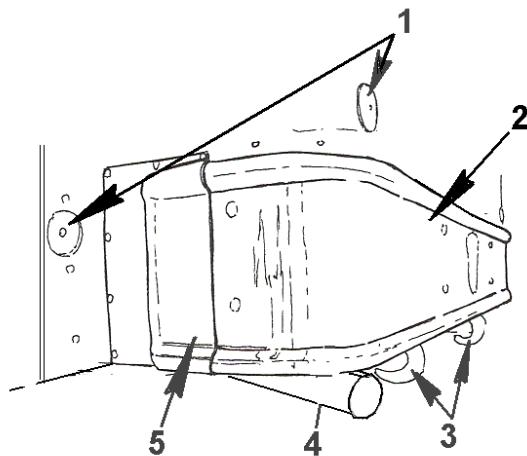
Rear Bumper Assembly and Tow Hooks G4700526
